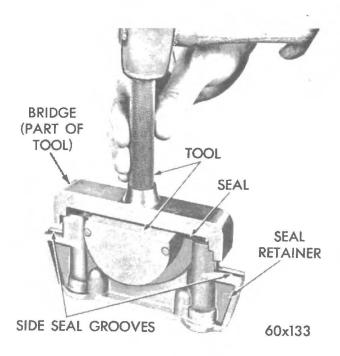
Installing rear main bearing oil seal (Tool CA-3743).
